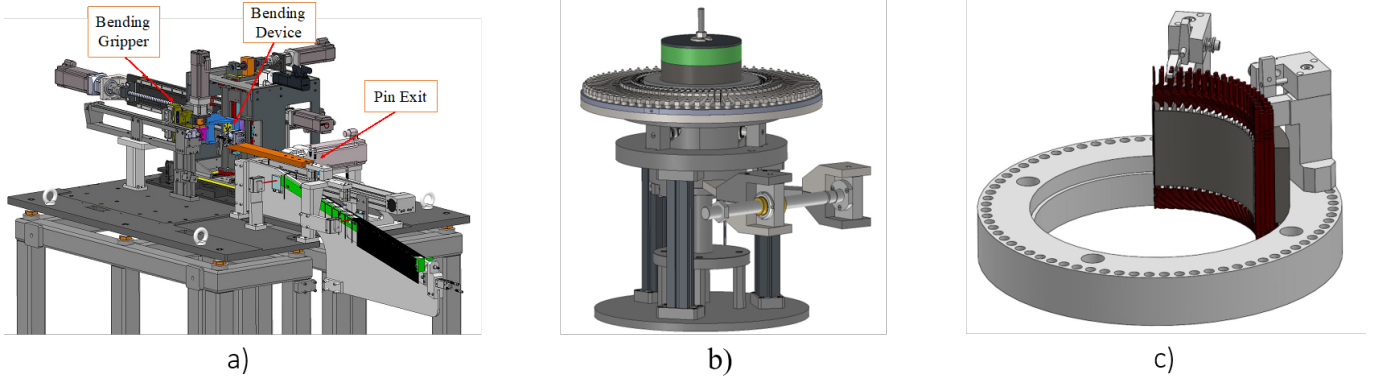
Details of the manufacturing line: a) bending unit; b) coil insertion station; c) welding station
